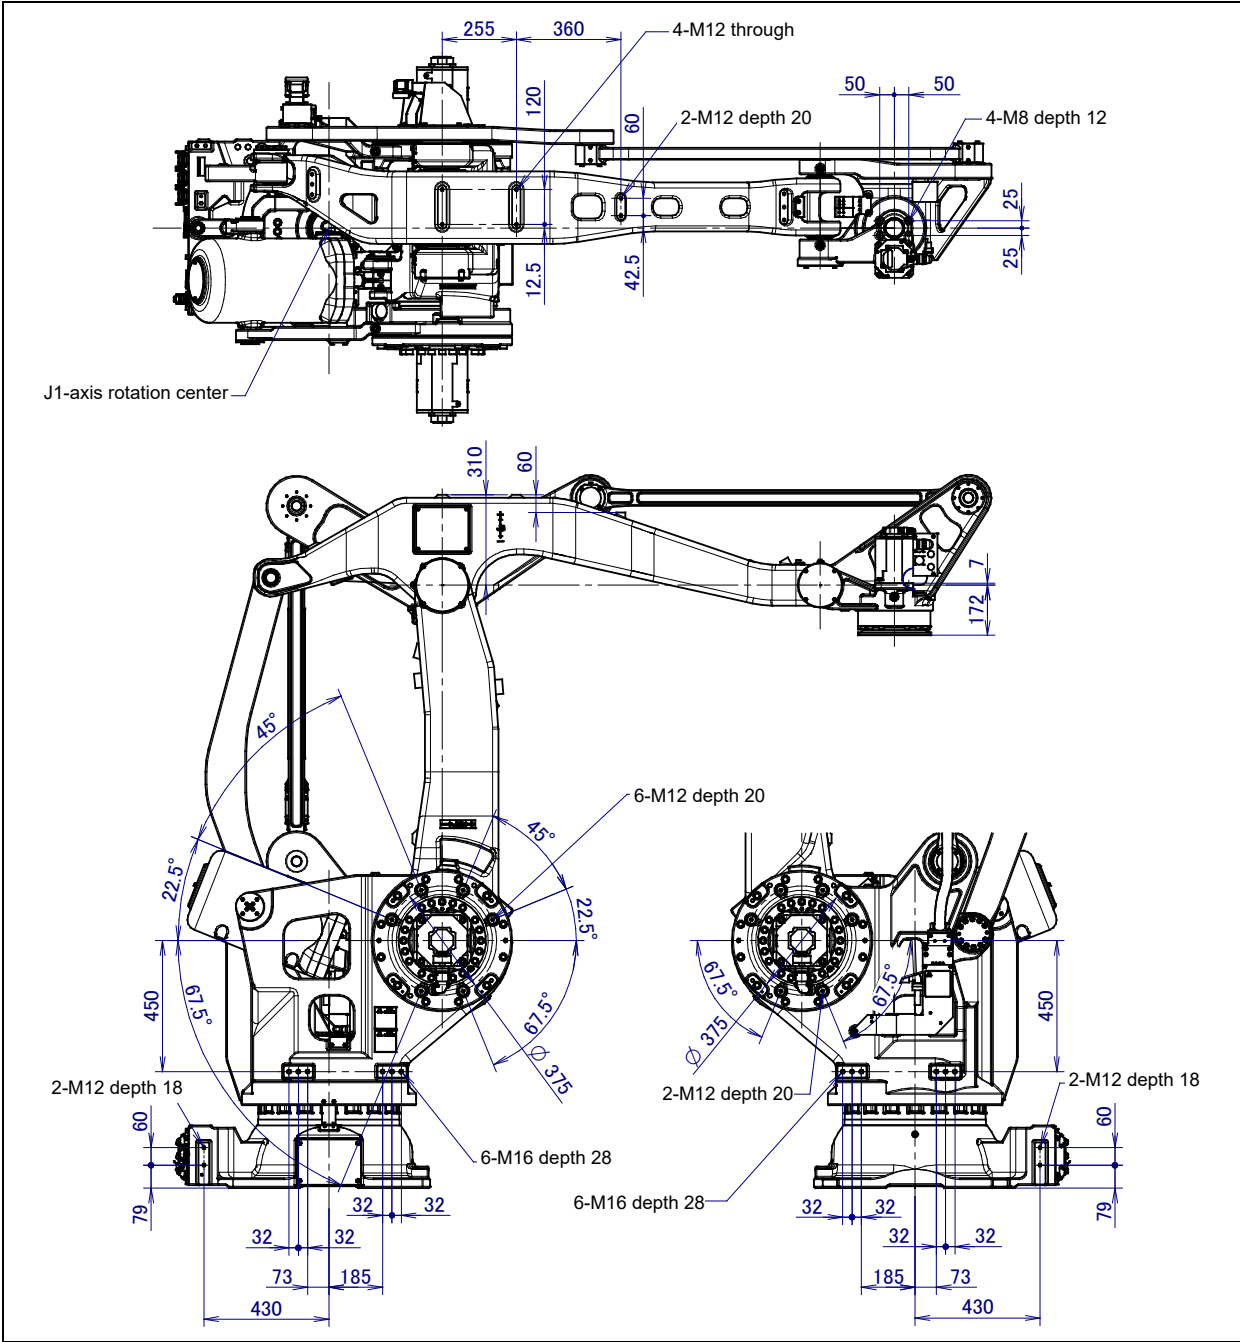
(c) Equipment mounting faces (M-410iC/500)
